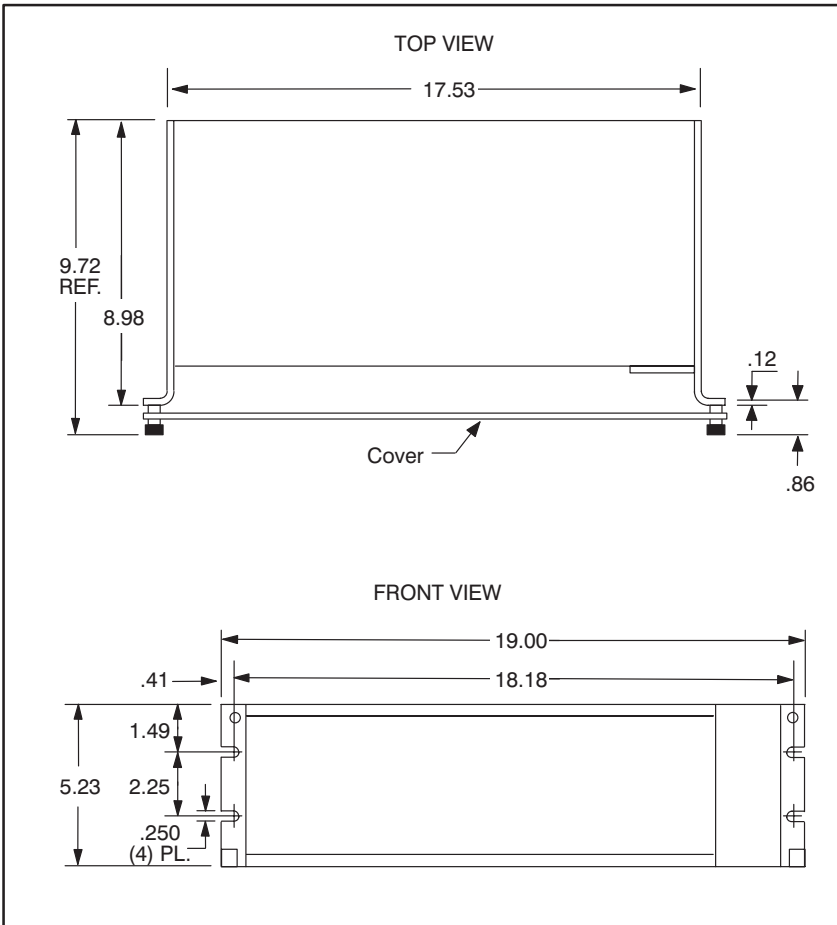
Fiber-Optic Rack Mounting Dimensions
